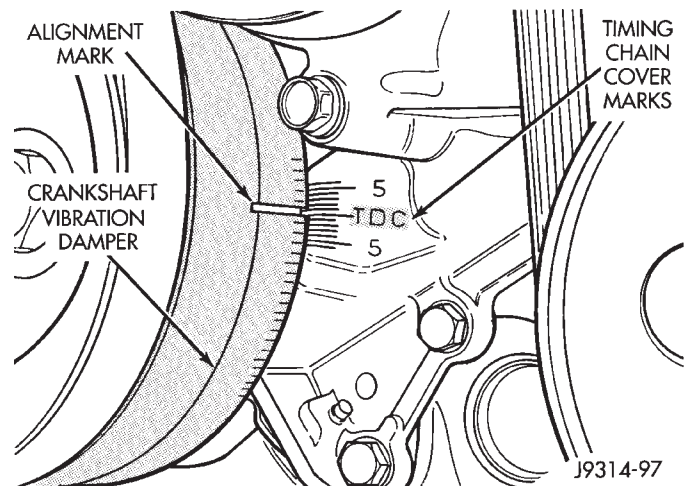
Damper-To-Timing Chain Cover Alignment Marks—5.2L Engine
